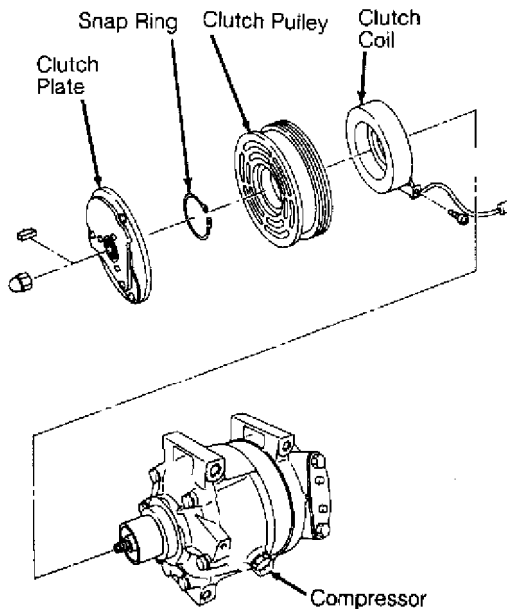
Exploded View Of Compressor Clutch (Calsonic V5)
